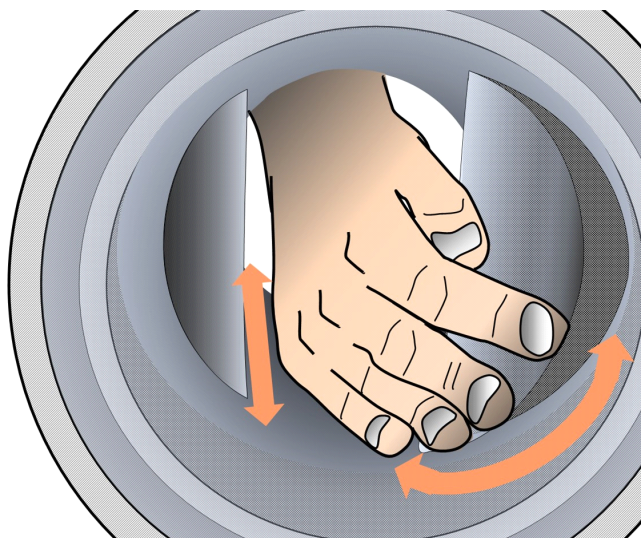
Tactile inspection of an abnormal burr of the casting
